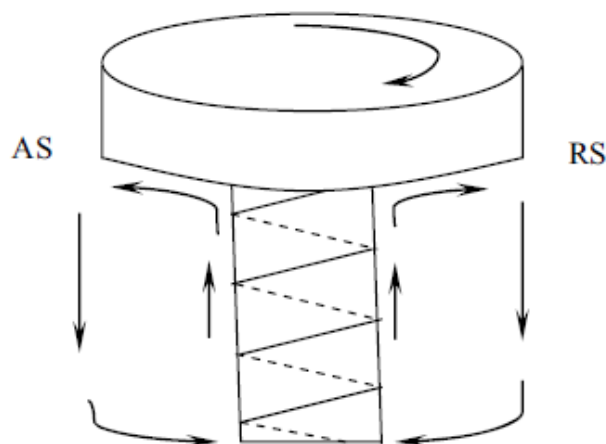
Material Flow of a Right-Hand Thread Pin Tool [24]
